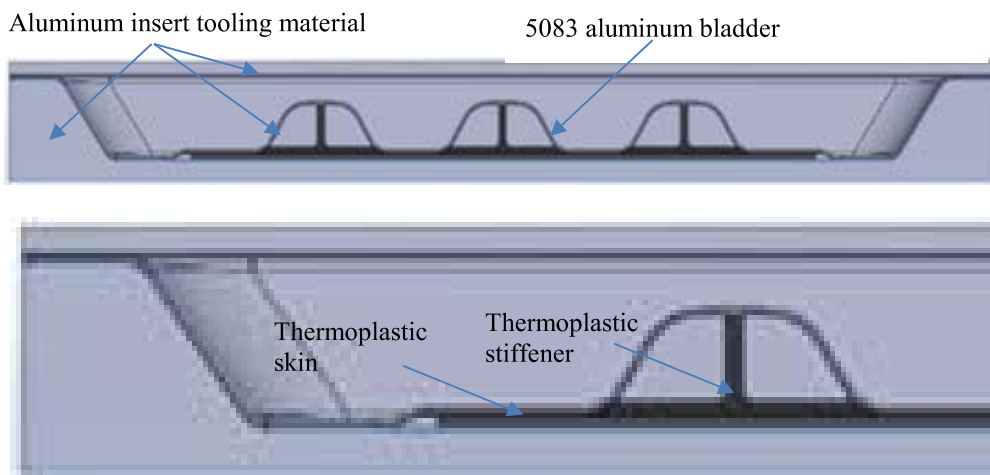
Cross-section of co-consolidation tooling for blade stiffened flat panels
